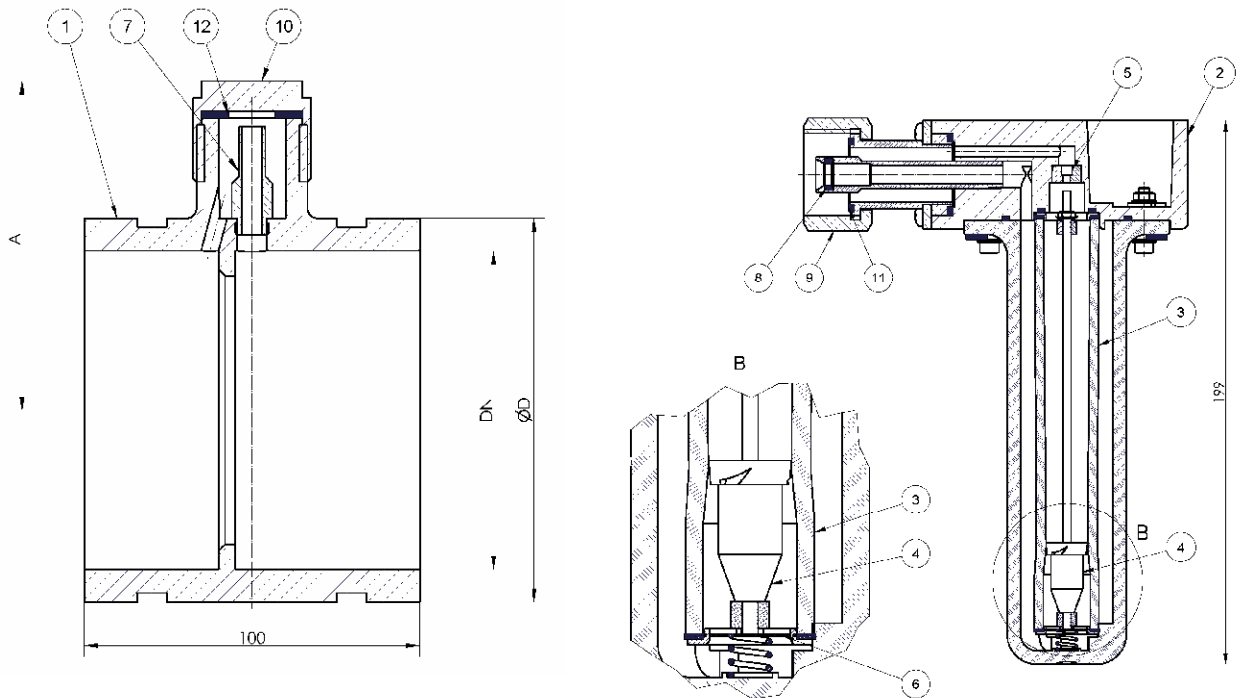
Turbo-Lux 3, Position drawing and dimensions in mm (inch)
